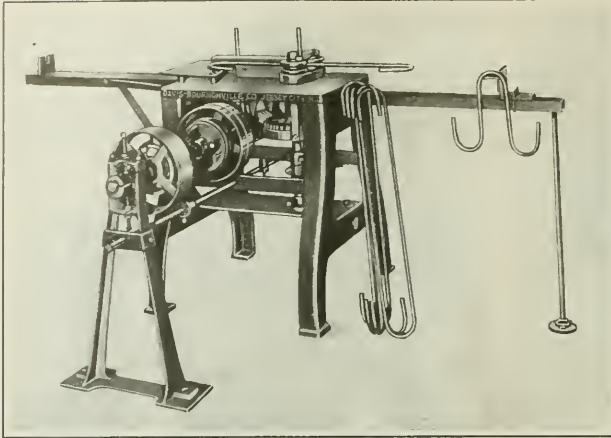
One Style of Tube-bending Machine developed by the Davis-Bourneville Co.
